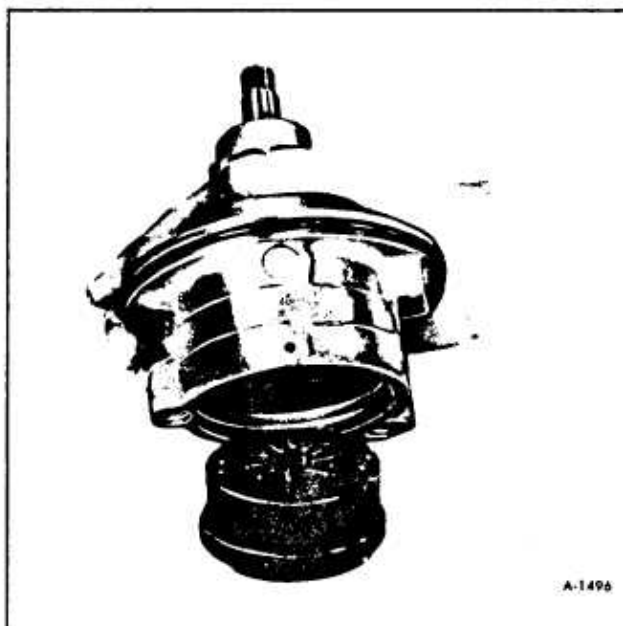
Removal of Shaft, Pressure Plate, Pump Ring, Vanes and Rotor
